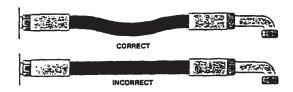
HOSE AND MACHINE TOLERANCES
